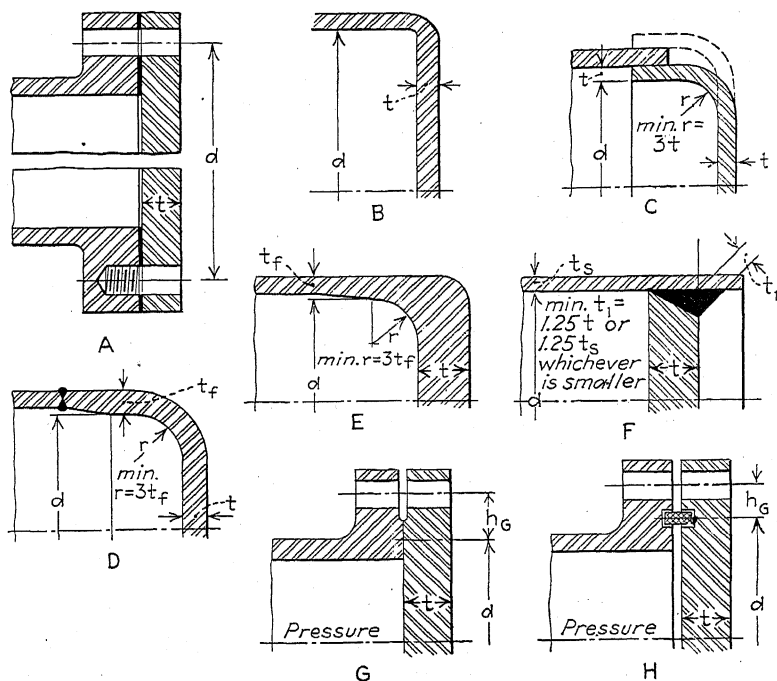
Solid, welded, and bolted heads. (A.S.M.E. Boiler Code.)
